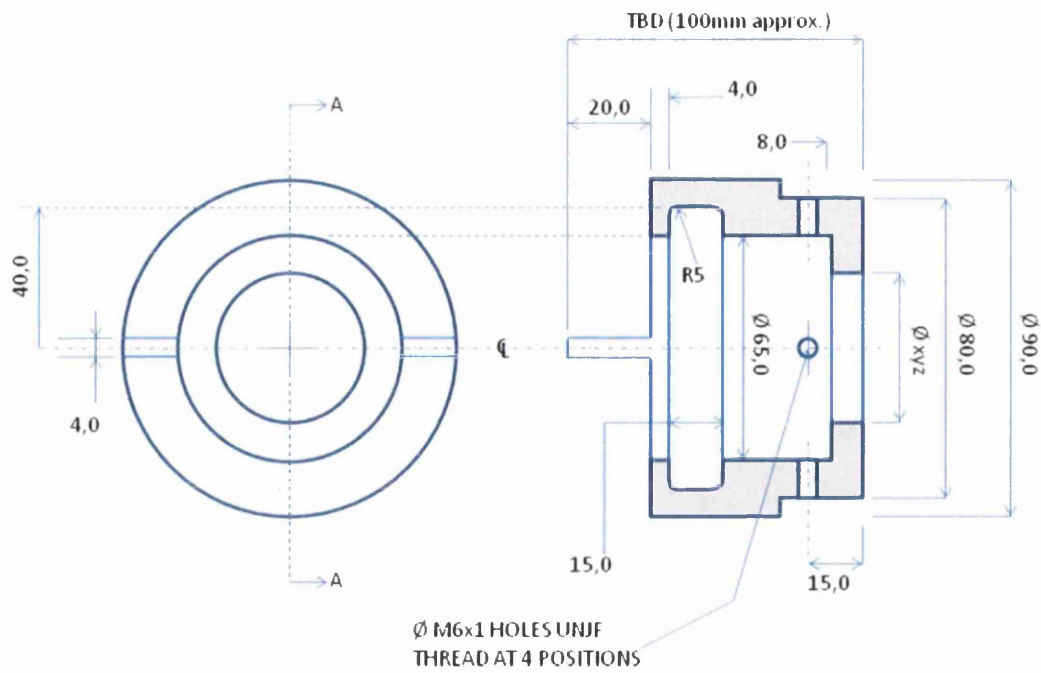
Technical drawing of fretting cup showing the dimensions.
